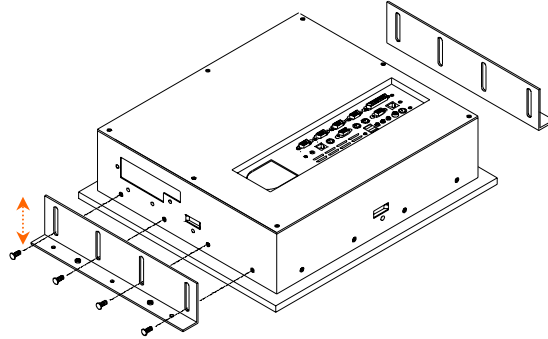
DISPLAY PAC OP MOUNTING
